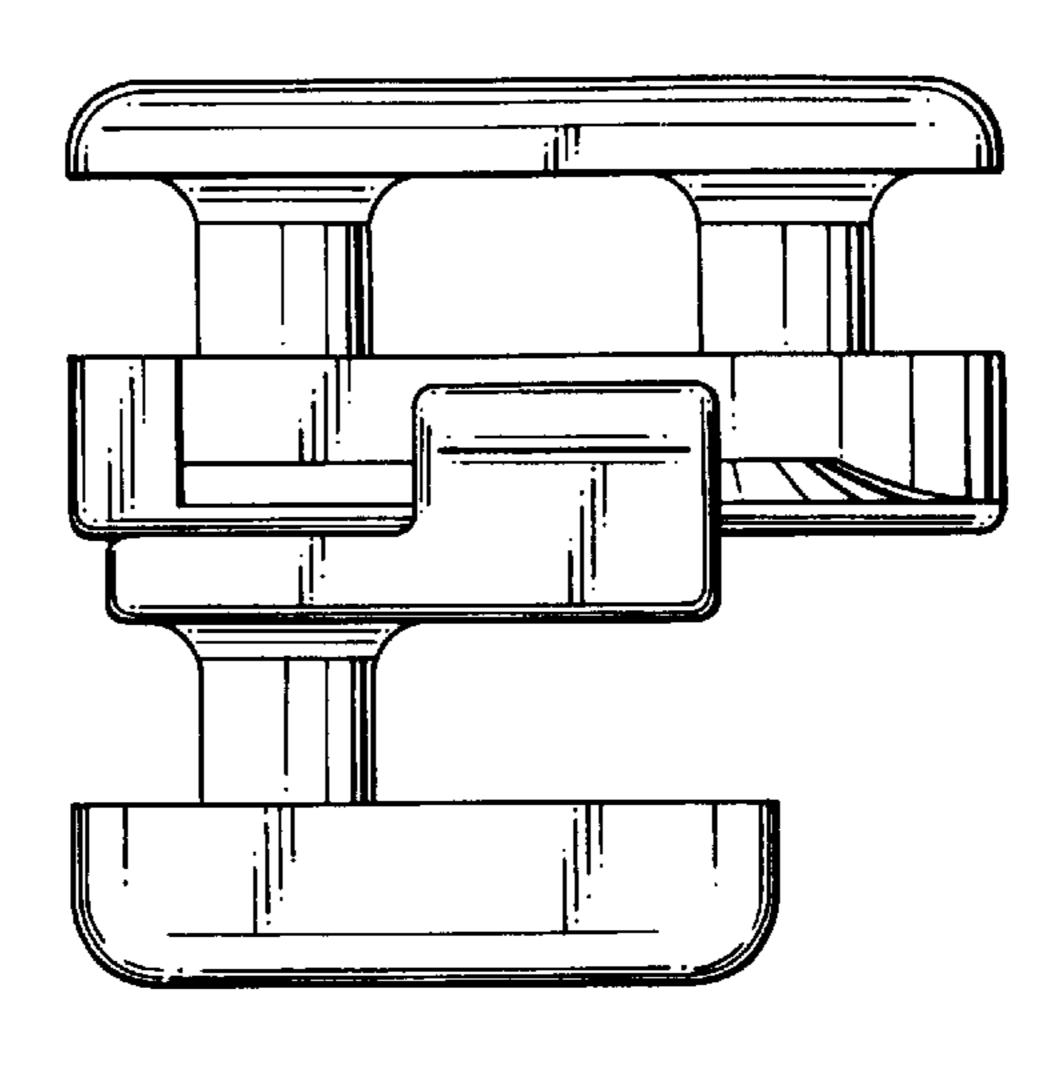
is a front view of the hook-and-eye fastener in coupled disposition.
